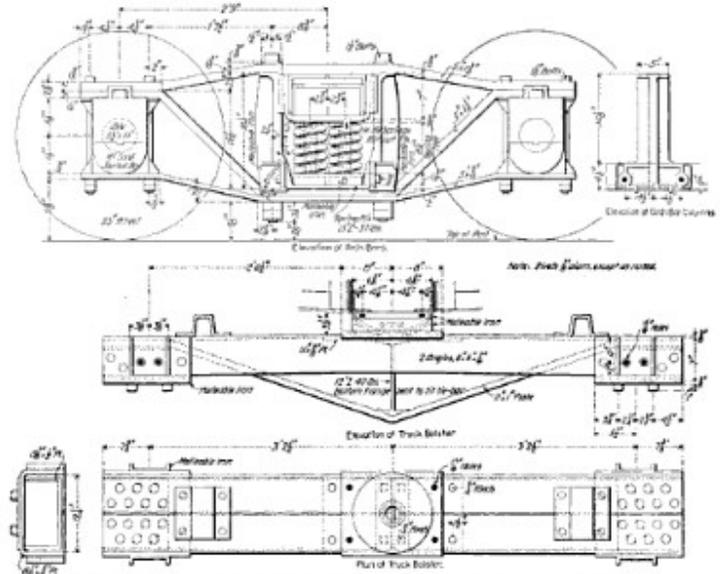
Side Frames, Bolster and Spring Plank of Bettendorf Truck. Bettendorf Axle Co.
